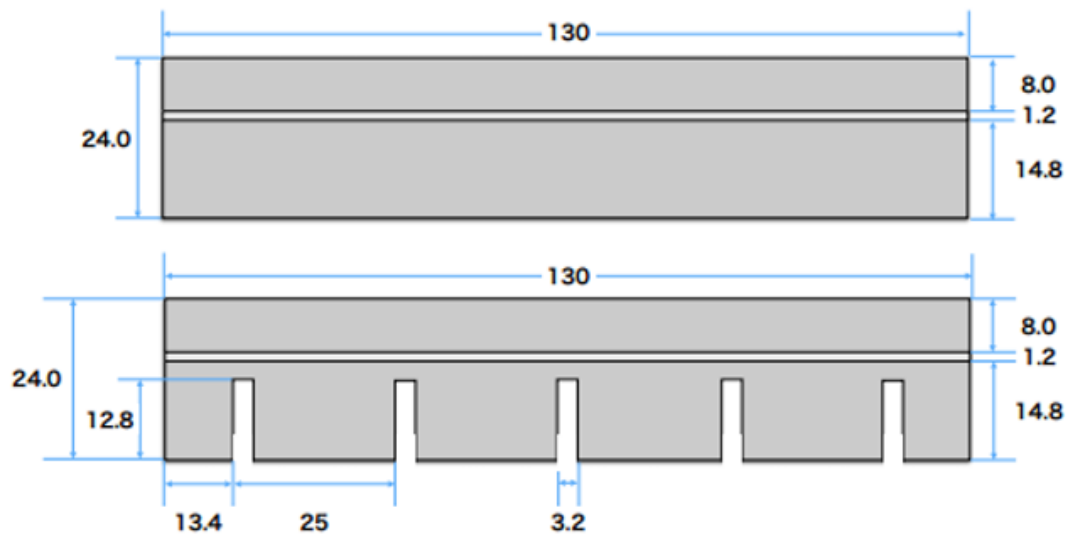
Dimension of the scintillator for the pre-prototype detector
